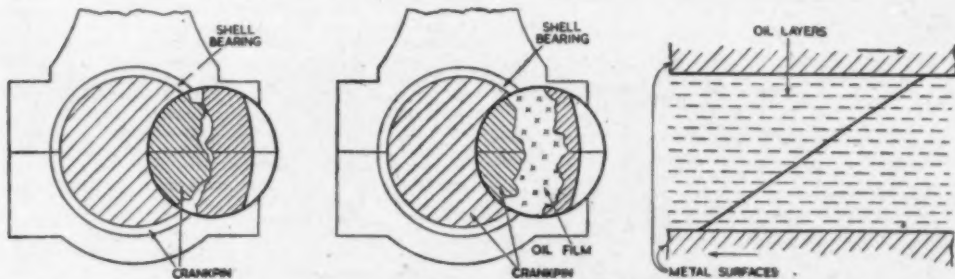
(Left) Minute projections on the bearing surfaces which, in an unlubricated condition, interlock and produce wear and the generation of heat as they slide over each other. Fig. 2 : (Centre) The oil film separates the metal surfaces and so precludes metal-to-metal contact, wear and metallic friction. Fig. 3 : (Right) Oil "layers" immediately adjacent to the metal surfaces will move with those surfaces as they move over each other; intervening layers will move proportionately less, the centre layer remaining stationary. The sliding of these layers over each other produces fluid friction.
